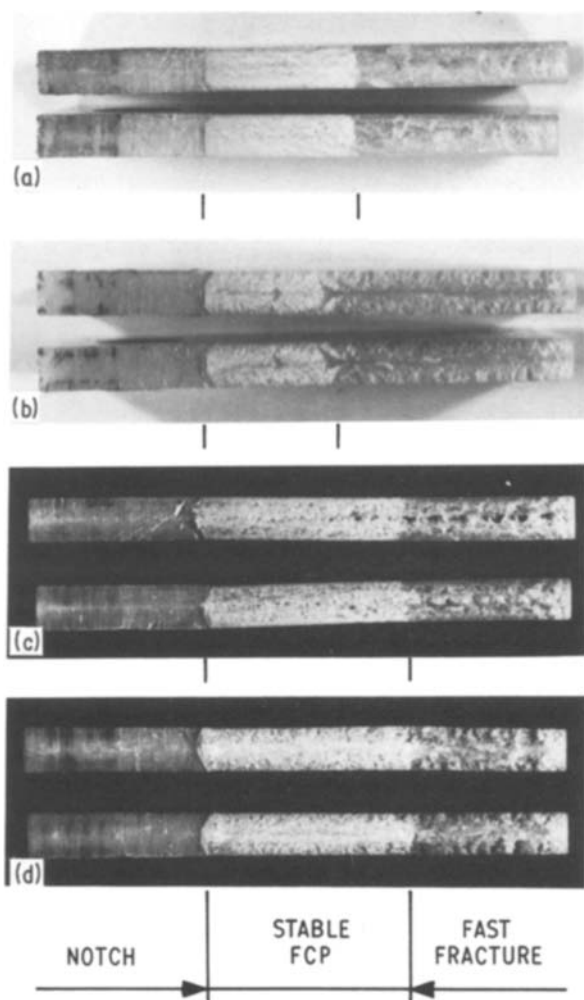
Macroscopic fracture surface appearance of (a) N66-18G(A-T); (b) N66-18G(A-L); (c) N612-25G(A-T); and (d) N612-25G(A-L).
